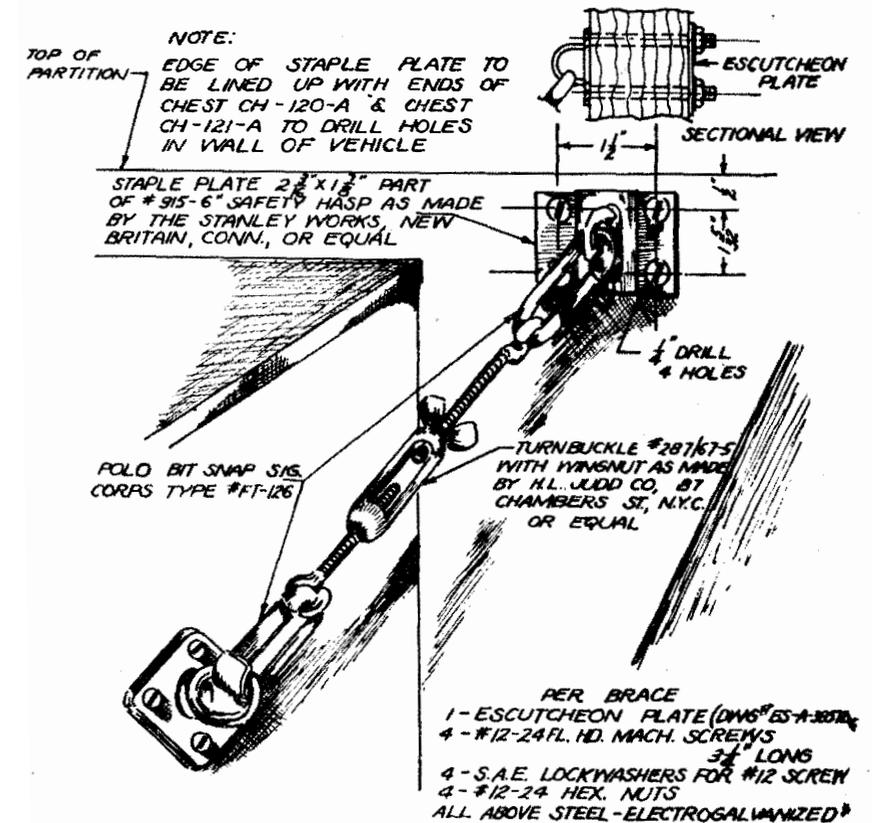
Drawing of turnbuckle brace used to hold chest in shelter.
